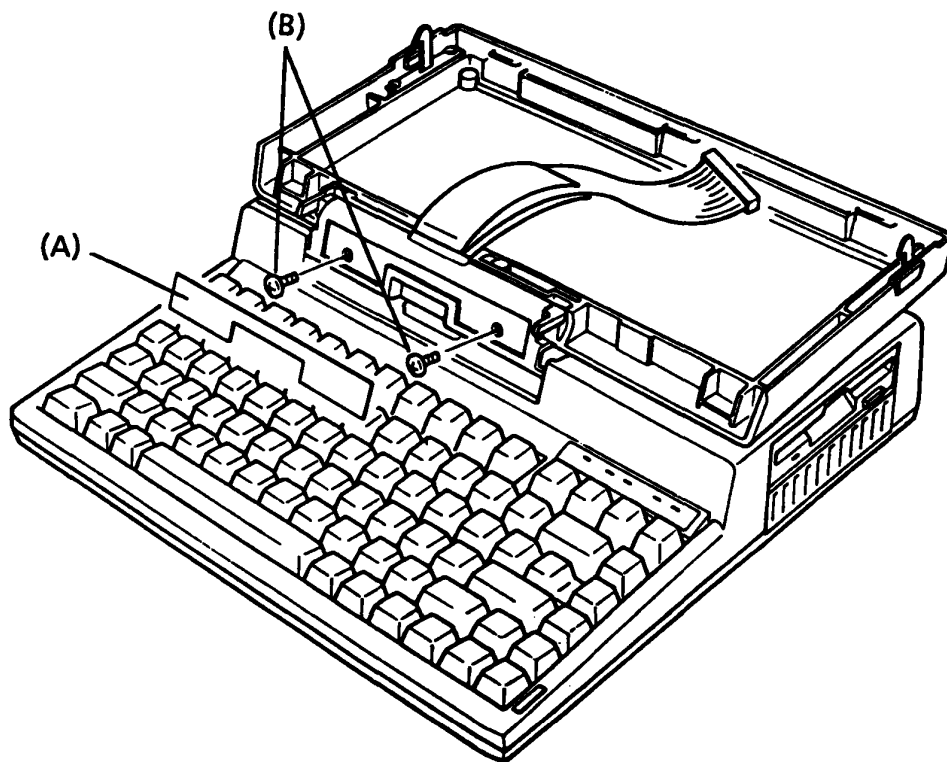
Removing the LCD Cover Subassembly Screws
